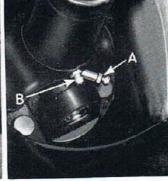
Lubricating front universal joint of propeller shaft with oil gun.
